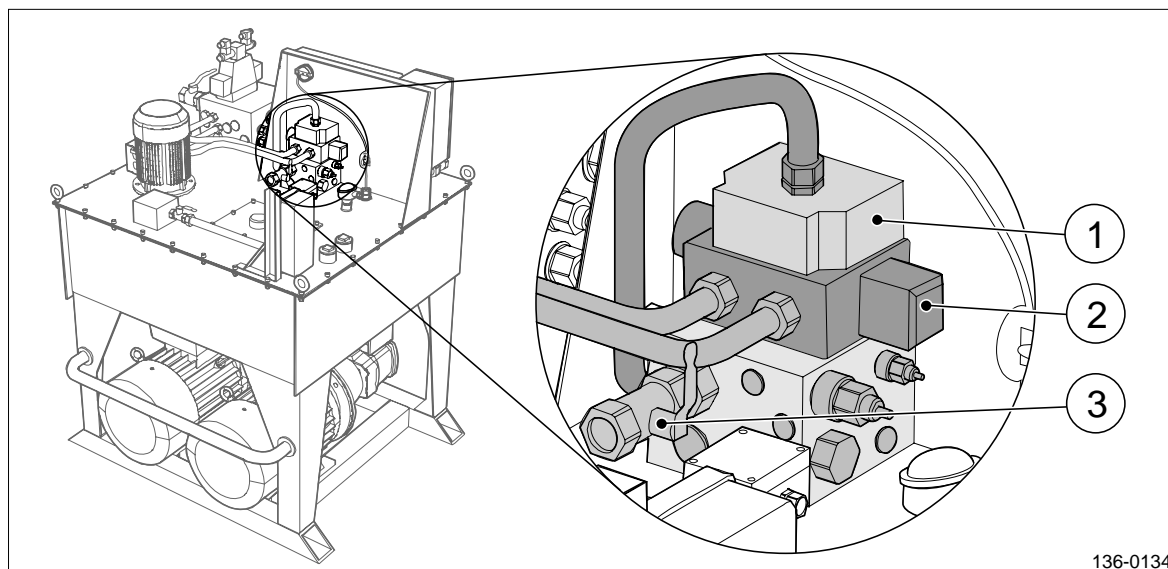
The rear of the emergency valve manifold on the hydraulic power pack unit.
